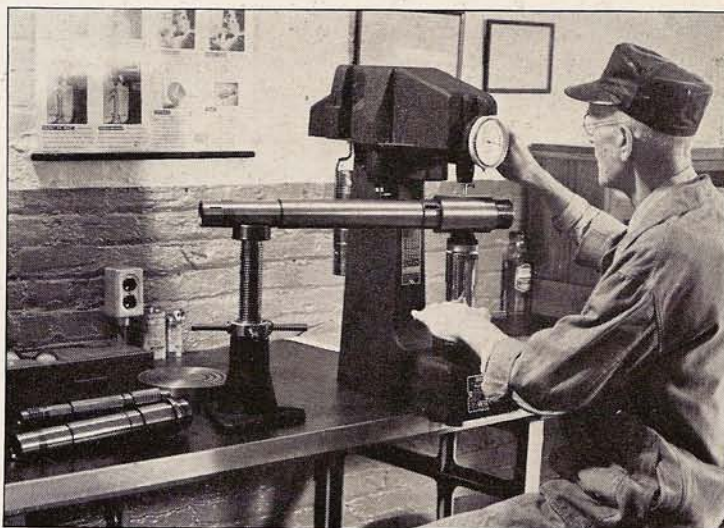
Above—Testing the Hardness of a Carburized Headstock Spindle Bearing Surface
